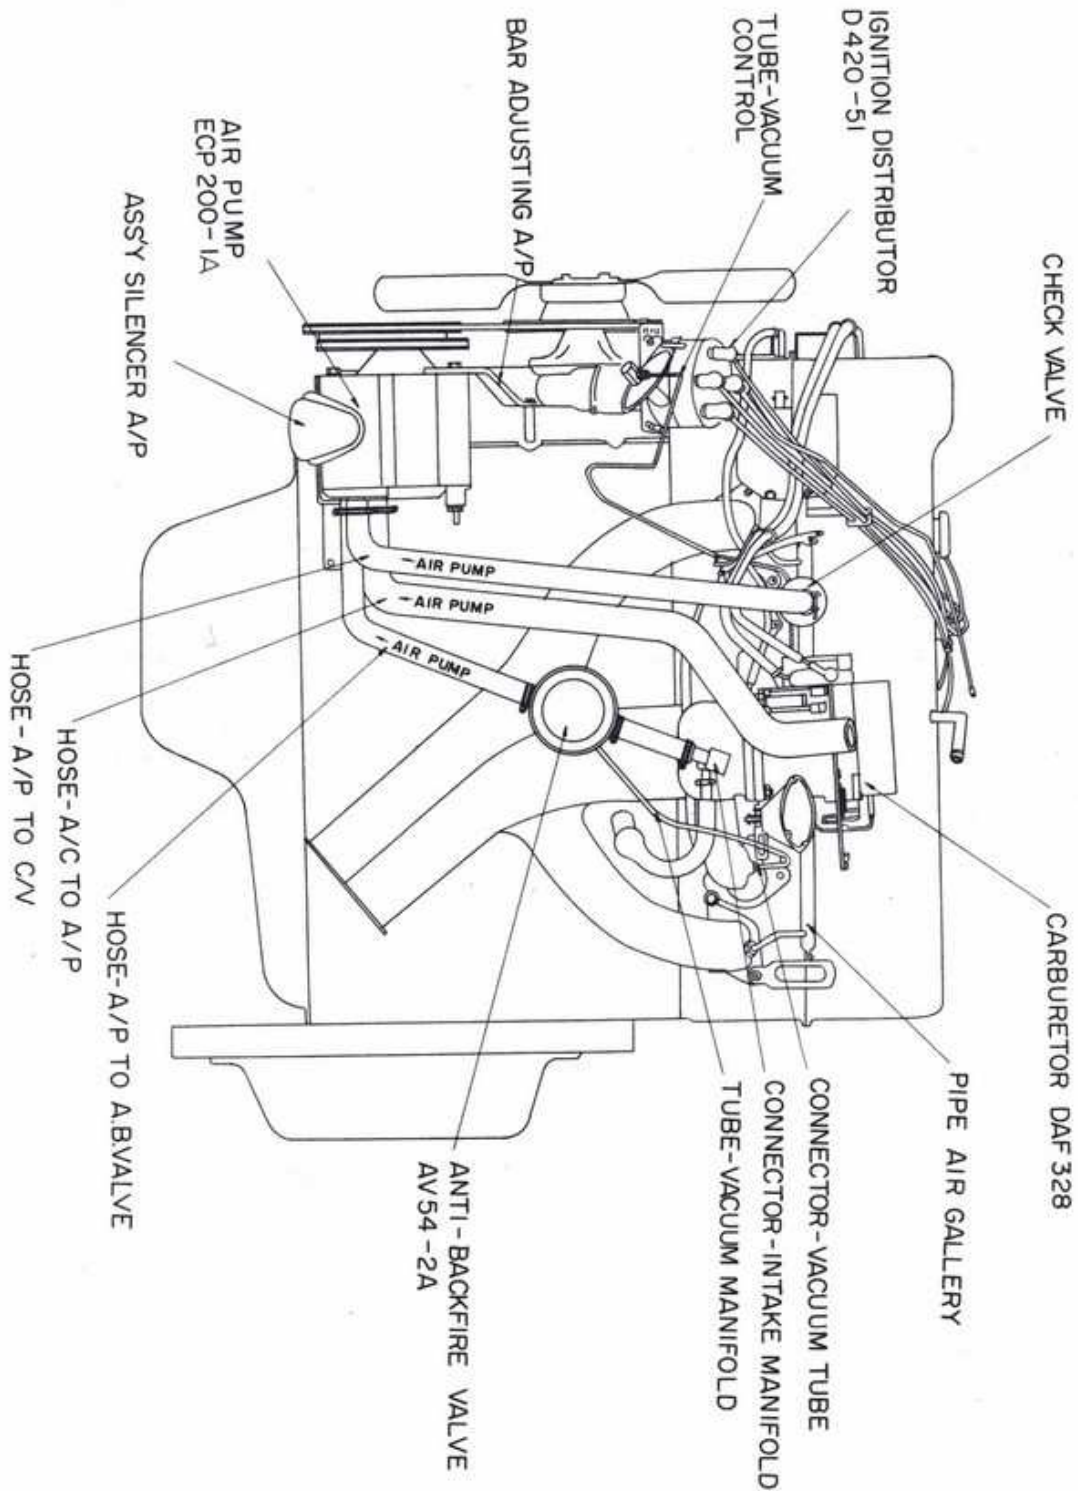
General view 97.4 C.I.D. (Model L16) engine
